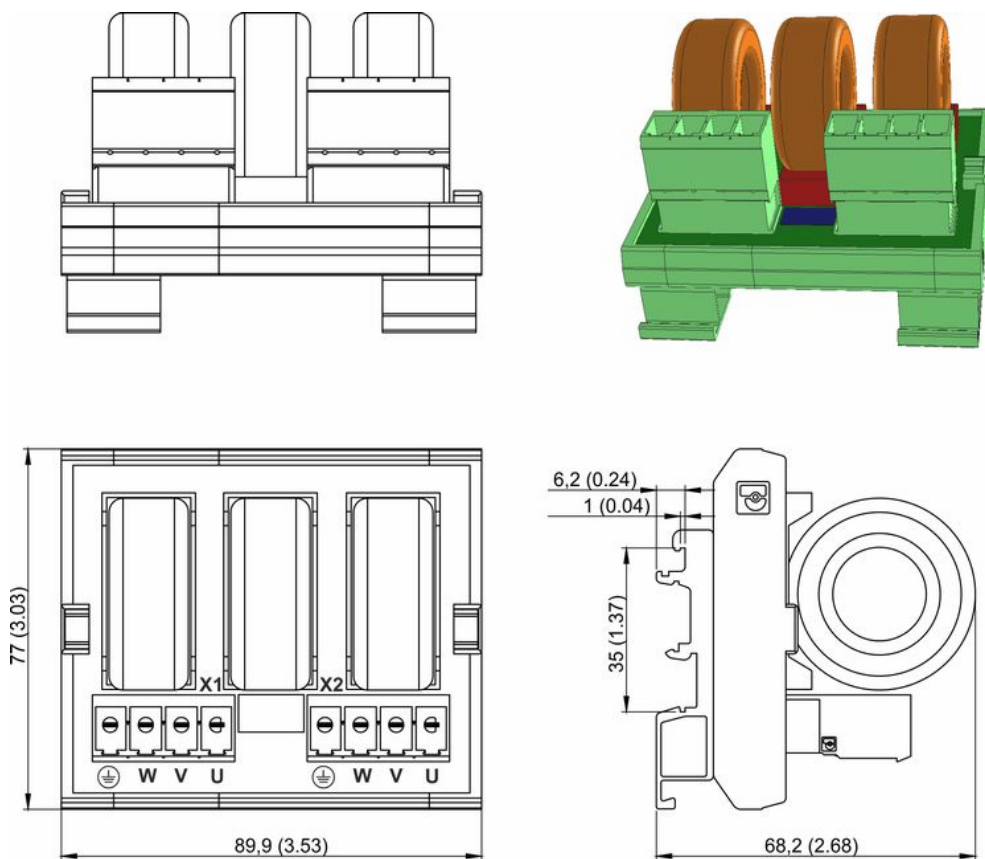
Dimensions of the choke module 036210180/A in mm (inch)
